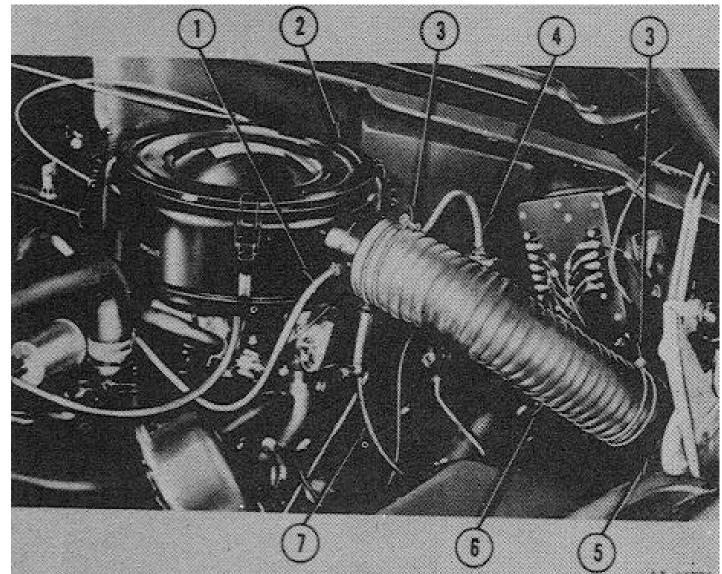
B8-AIR CLEANER FLEXIBLE AIR TUBE
